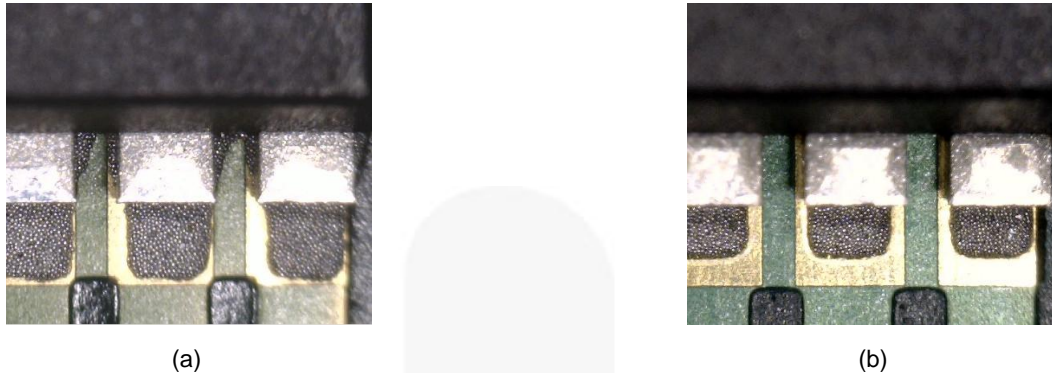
(a) Compressed Solder Paste, Paste Bridging is Observed, (b) Good Unit Placement
